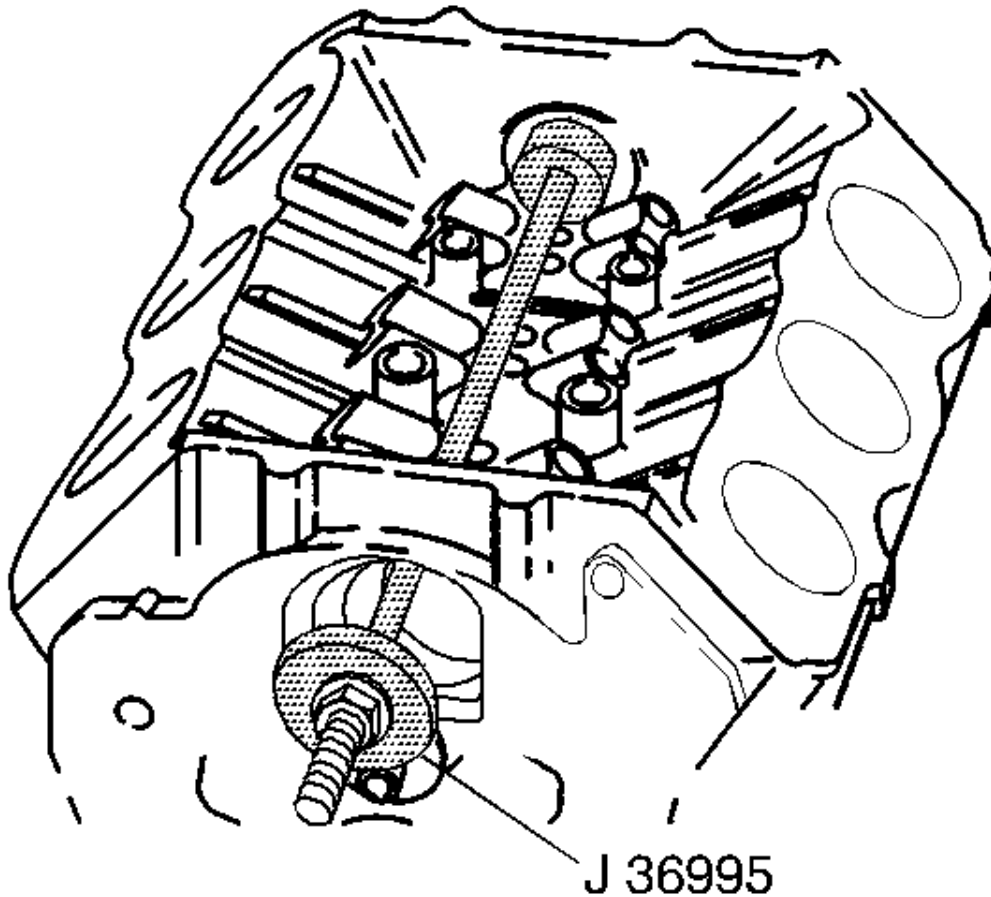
Removal of Balance Shaft Bushing with J 36995
